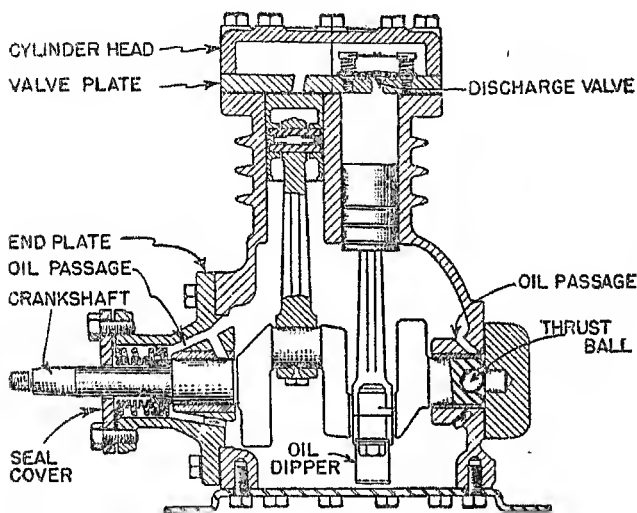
A Two-cylinder Reciprocating Compressor.
